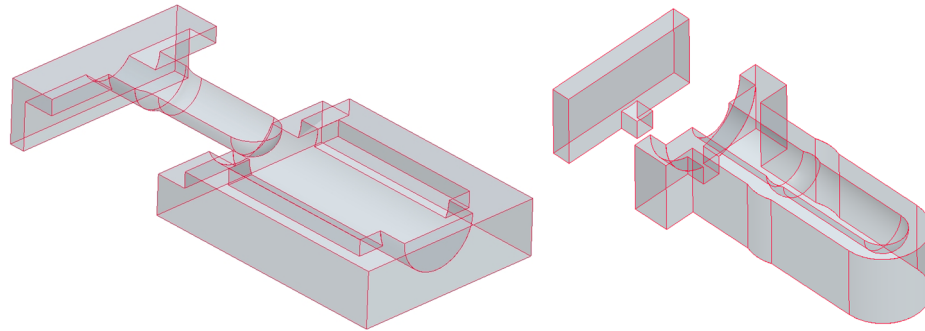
Pro Engineer Wildfire 4.0 rendition of the rapid prototyped ABS parts used to create the outer candle wax mold (left) and the insert candle wax mold (right)
